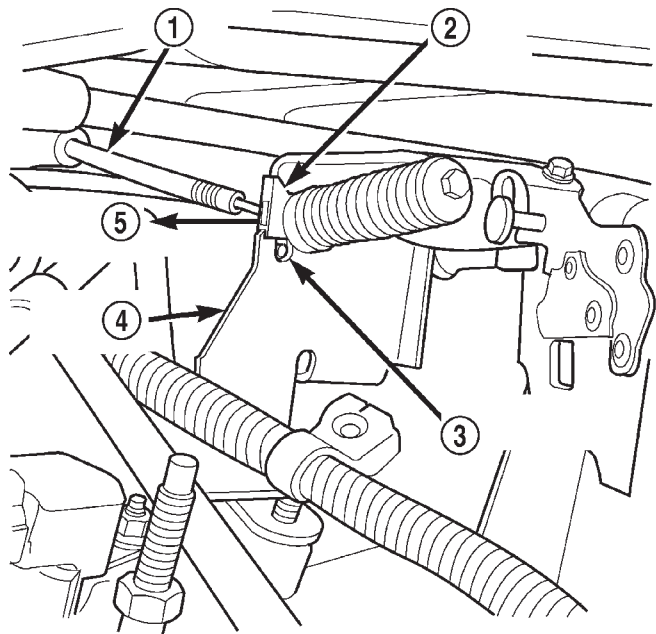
Accelerator Cable Release Tab—4.7L V-8 Engine
